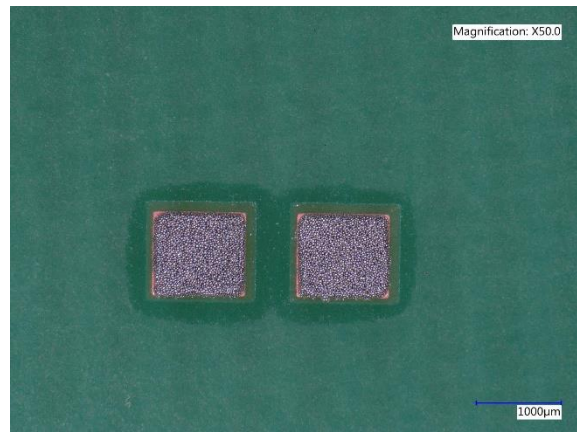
Solder Paste Deposits for a 0603 Chip Resistor
